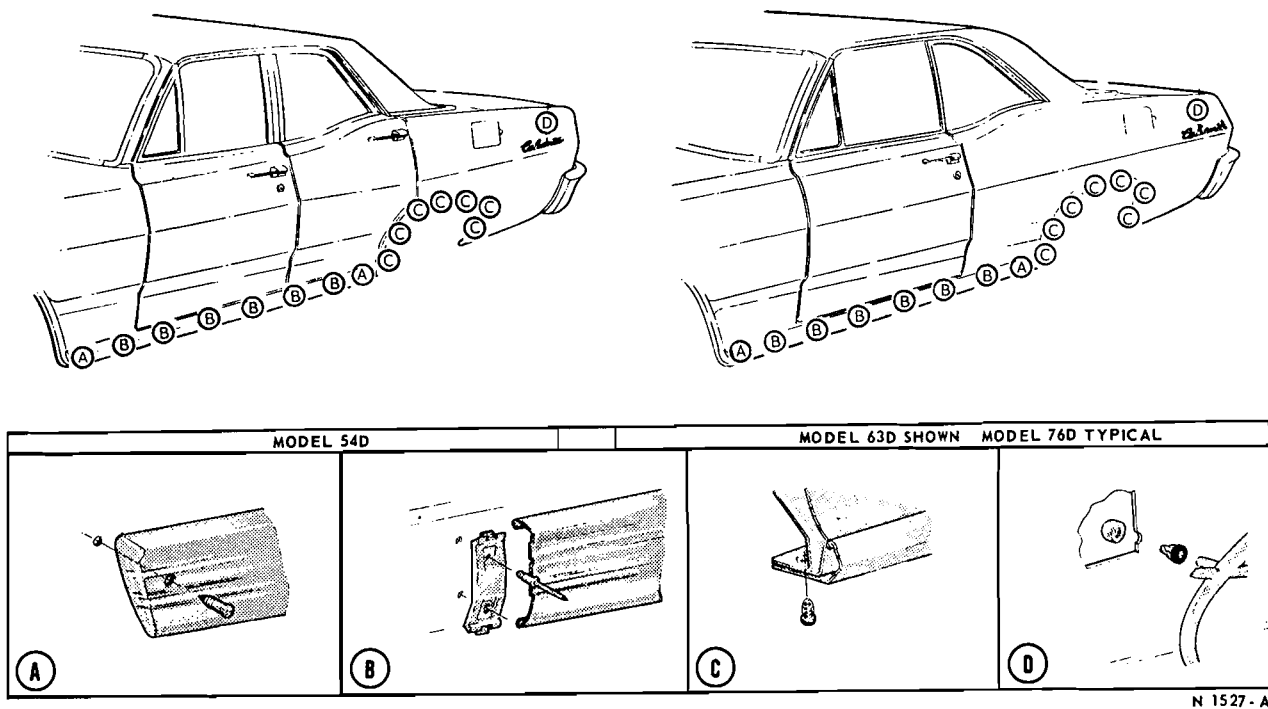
Mercury Intermediate Exterior Side Mouldings—Models 54D, 63D, 76D
